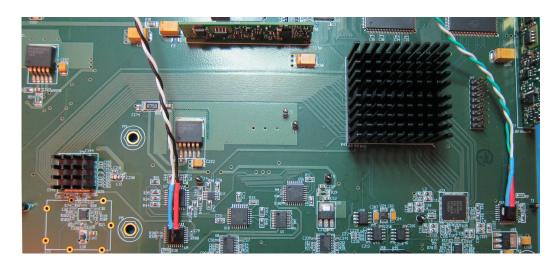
iGp12 PCB with heat sinks and temperature sensors installed.
